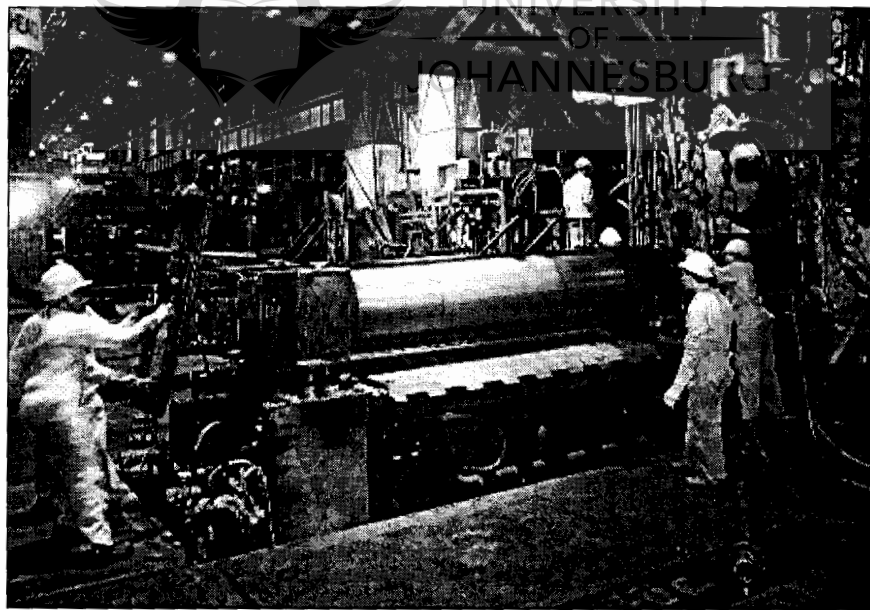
A roll change at the hot reversing strip mill (steckel mill) in Highveld's flat products complex [14].
